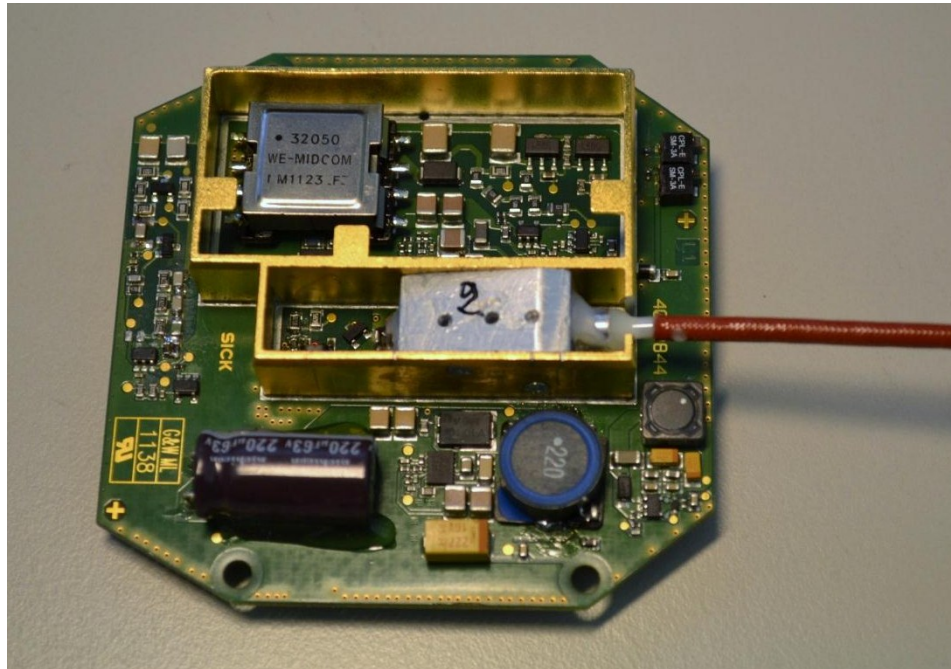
Top side of the PCB Laser. The housing contains the HV power supply, parts of the laser driver and the laser diode with the optical fibre.
